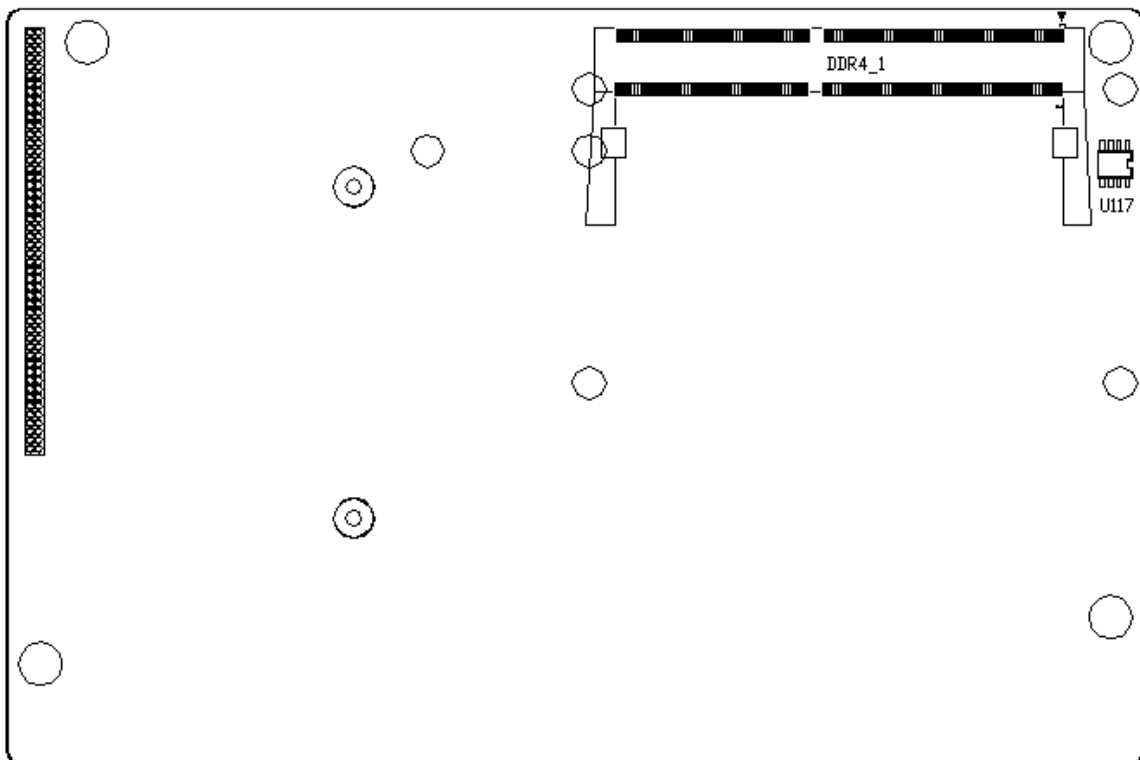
Jumpers and Connectors Location- Board Bottom
